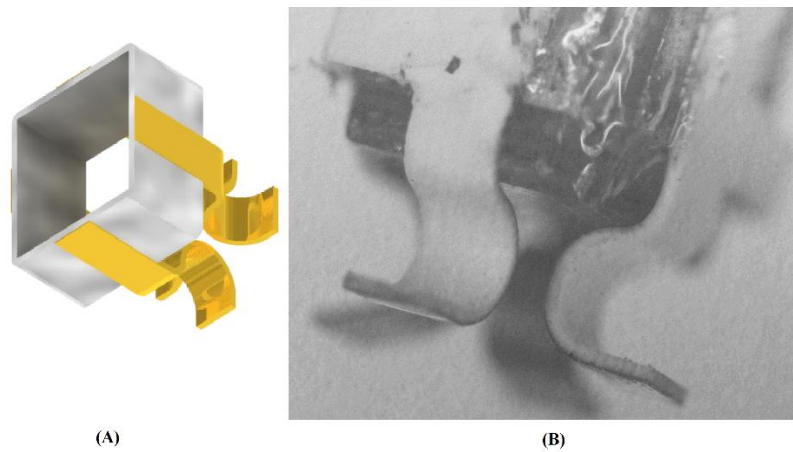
(A) Rendering of the Wraparound Assembly Technique (B) Installed Springs Using Wraparound Technique
